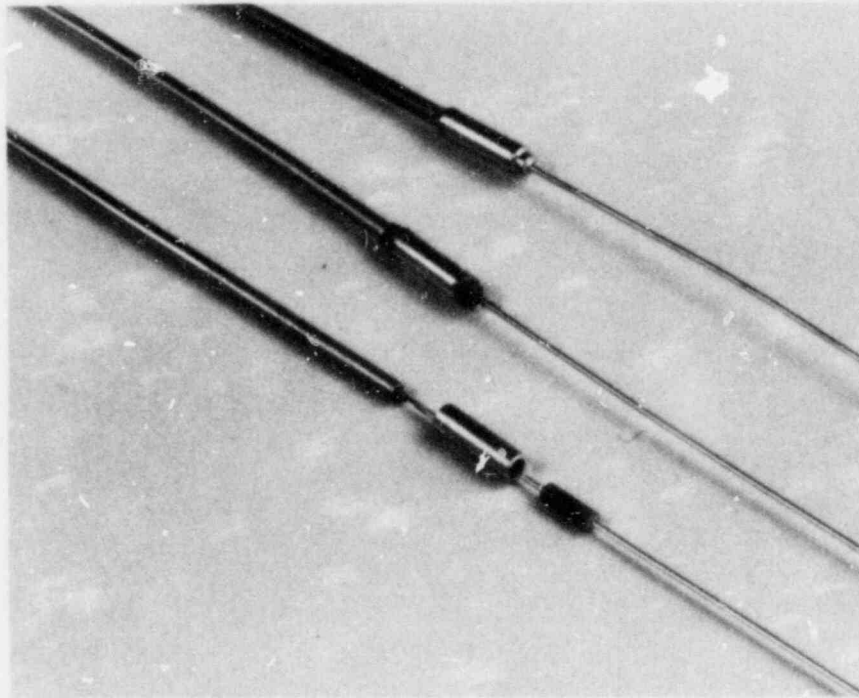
Assembly steps for end seal on 1.60-mm-diam triaxial cable. Bottom, platinum sleeve and cermet insulator on the cable. Center, after application of brazing filler metal powder. Top, after brazing.
